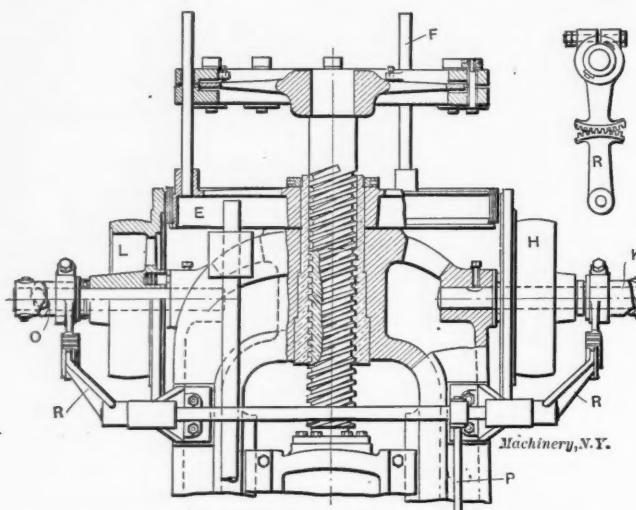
Section of Fly-wheel and Driving Arrangement.
